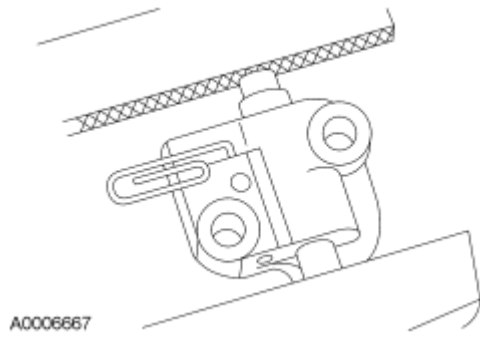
Retaining Tensioner Piston With 1.5-mm (0.06-in) Wire Or Paper Clip
